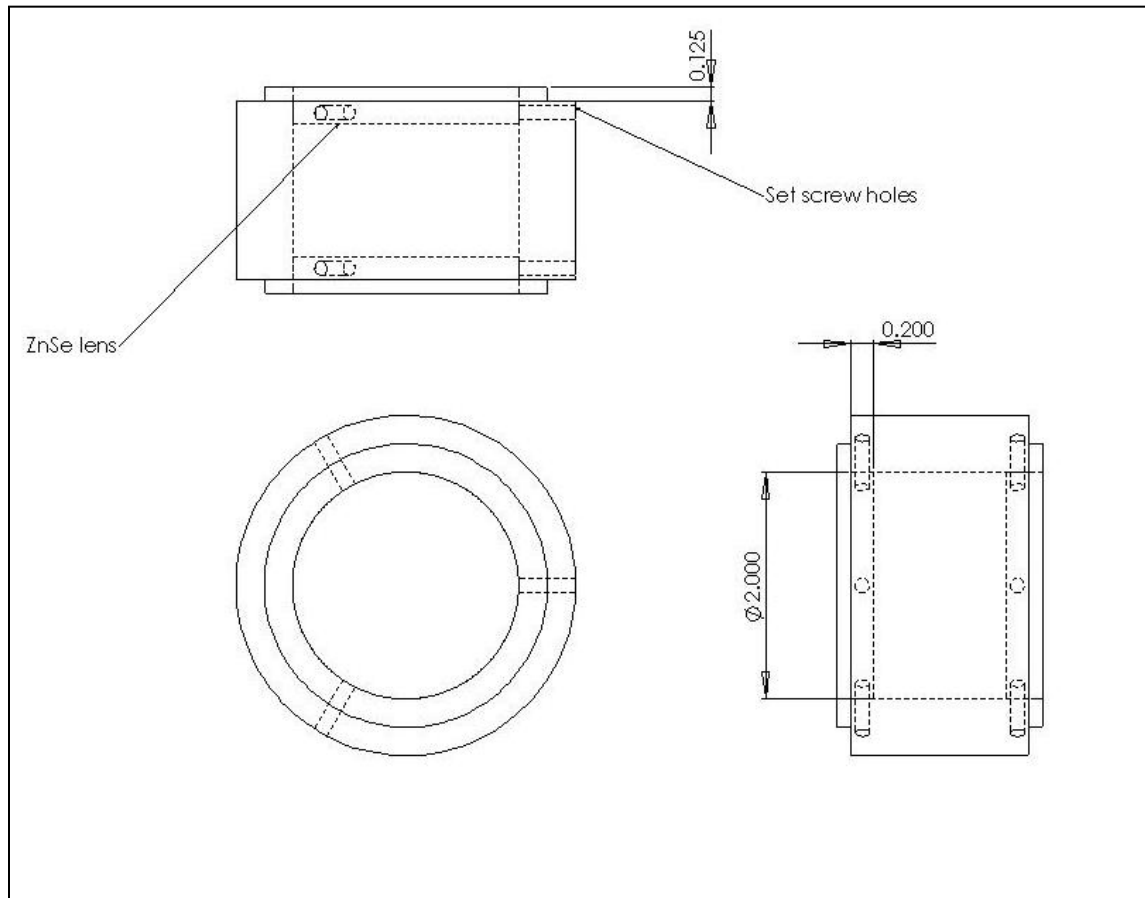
Drawing of phenolic tube and ZnSe lens assembly
